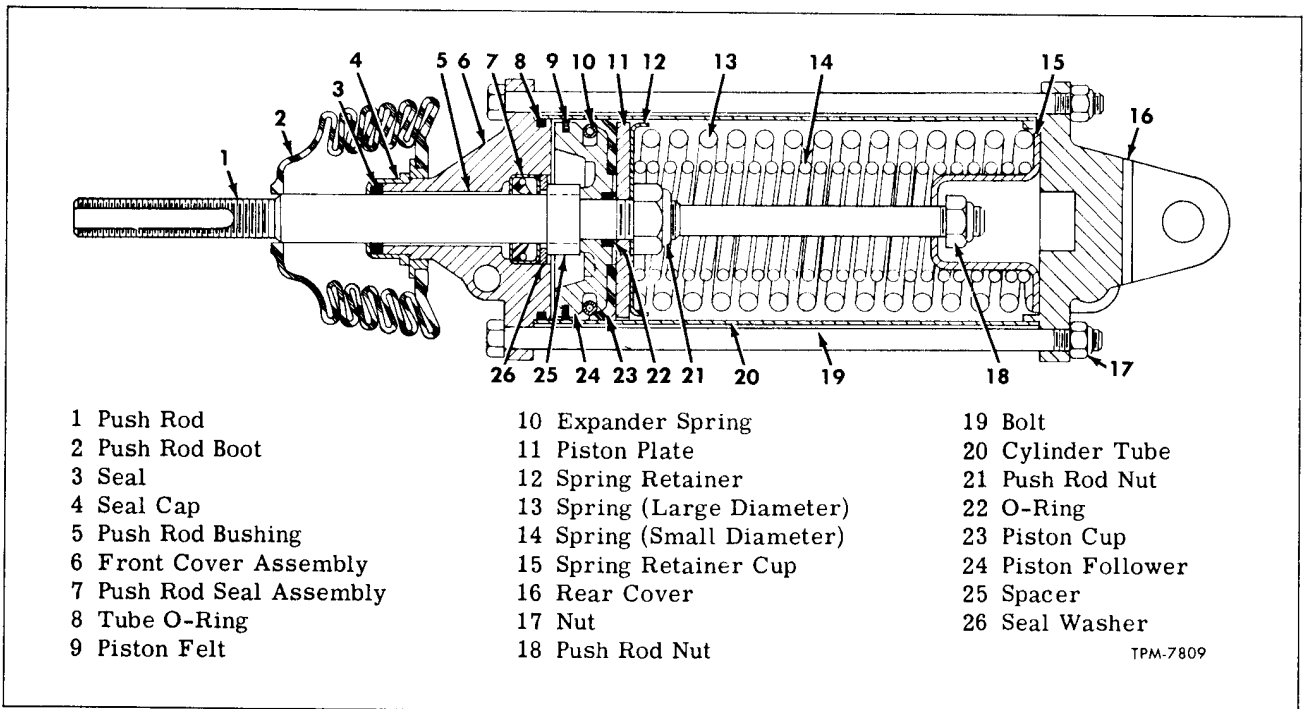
Compressor Clutch Control Air Cylinder Assembly
